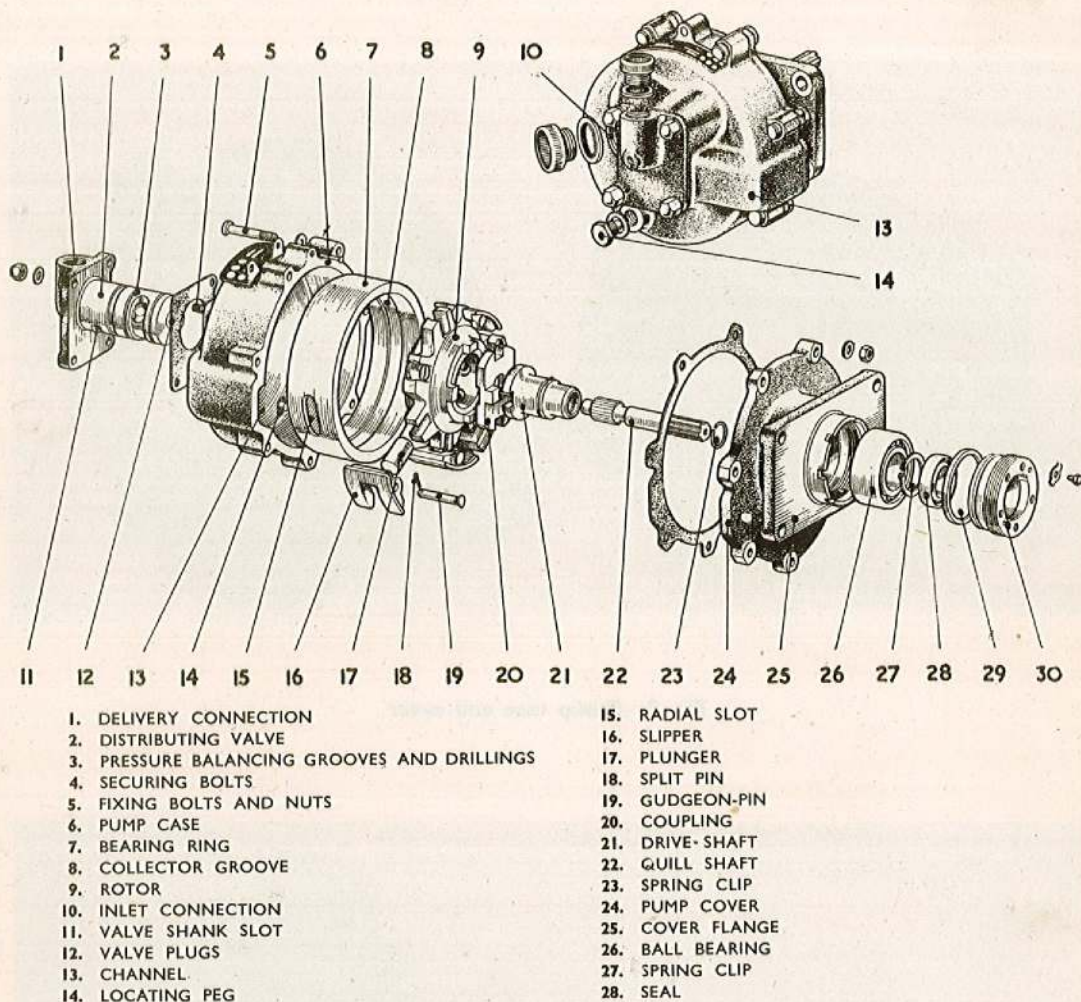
Exploded view of H.P. fuel pump, type A.260Y, Mk. 5
